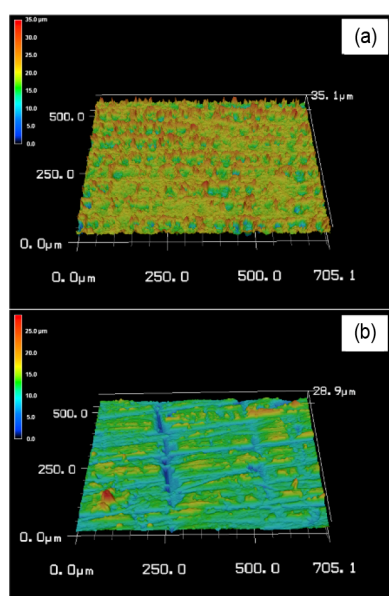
The 3D morphology of aluminum alloy: (a) laser cleaning; (b) grinding.
